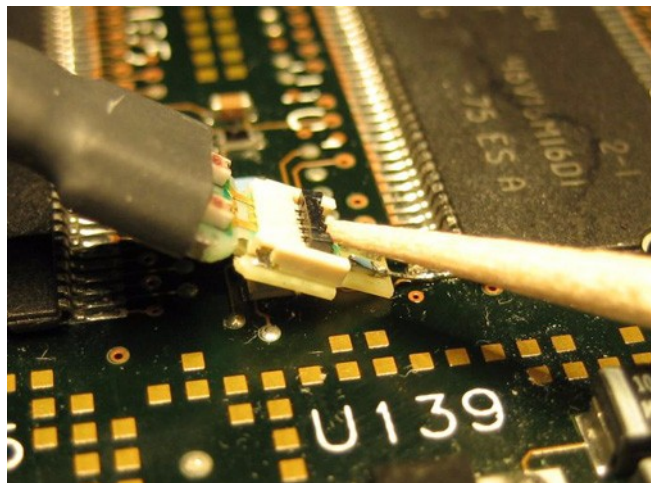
Using a Non-conductive Tool to Open the ZIF Connector
